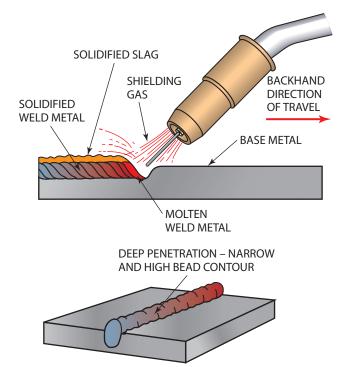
Backhand welding or dragging angle.
